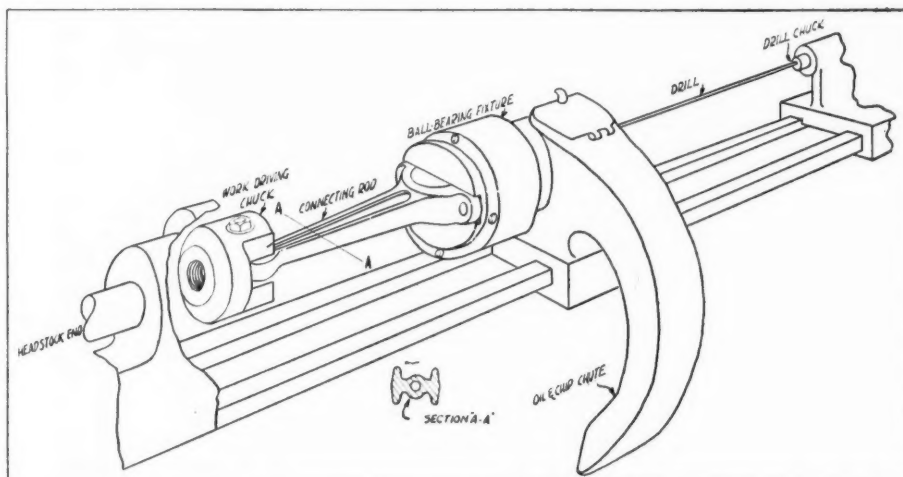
Set-up for drilling connecting rods in Pratt & Whitney No. 1 deep hole drill
